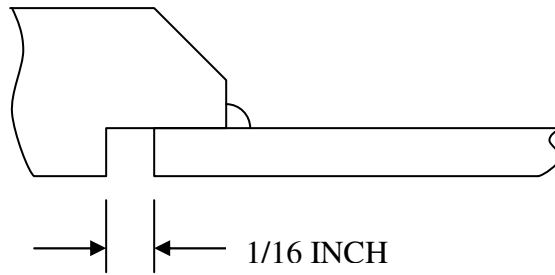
SOCKET WELD LOCATION
